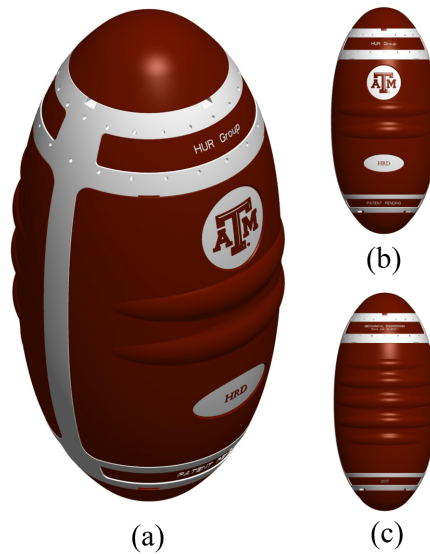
Final design: (a) Isometric view (b) Front view (c) Back view
